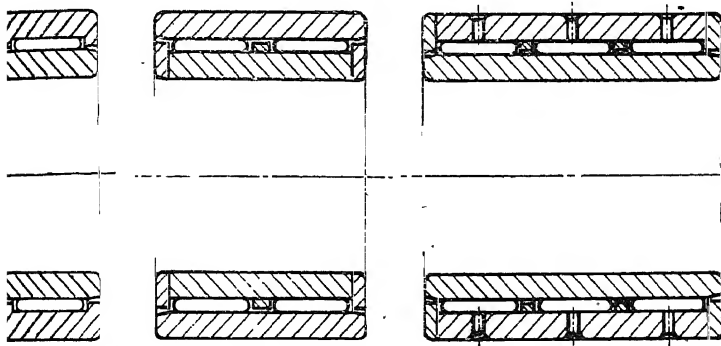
Special lip arrangements for cylindrical roller journal bearings.
